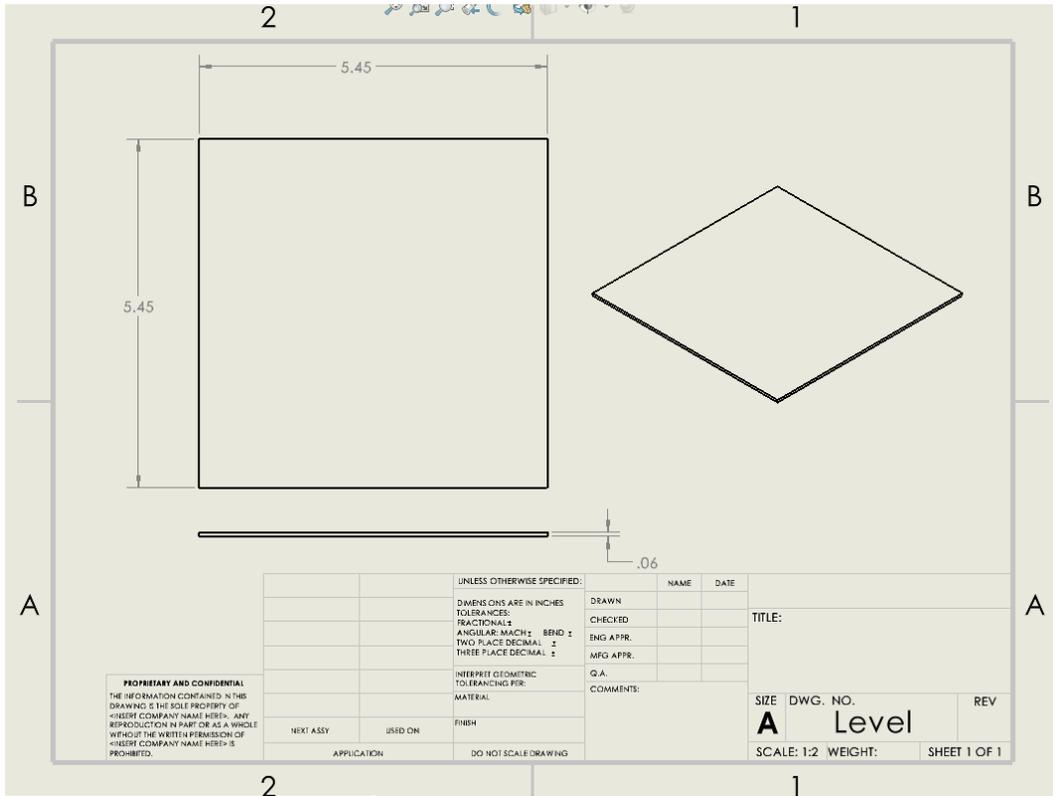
Mechanical drawing of UVI-GREAT structure level
